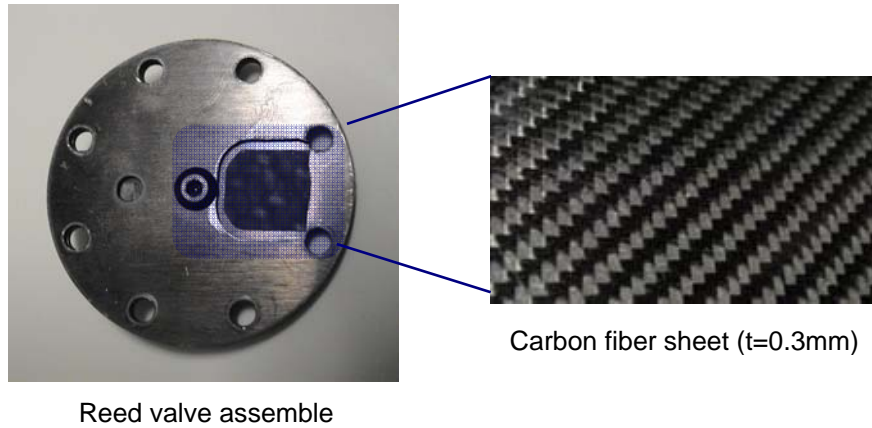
Photograph of new reed valve assemble using carbon fiber sheet
